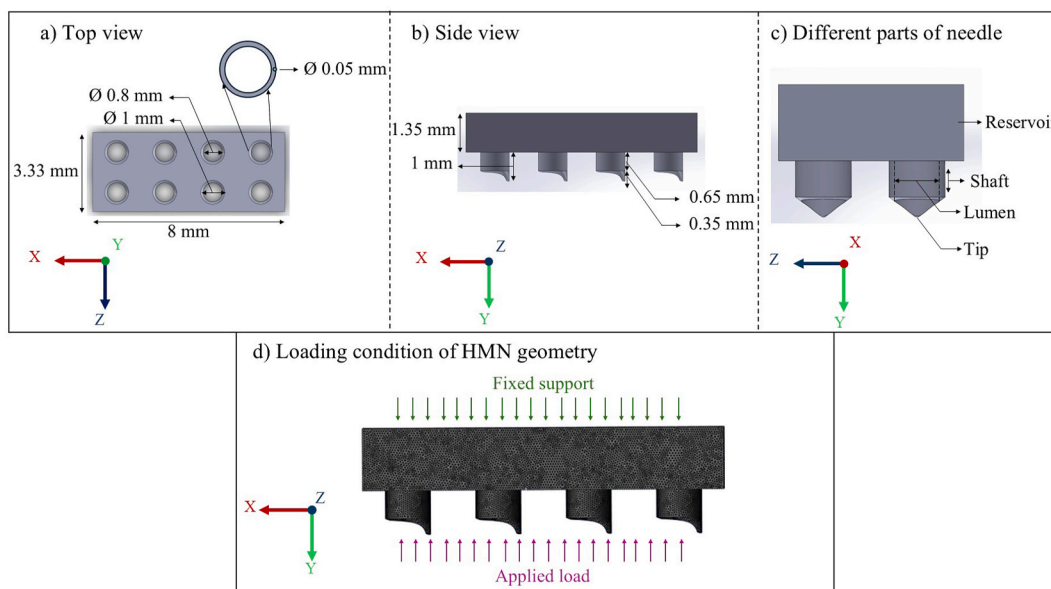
(a) Top view; (b) Side view; (c) Different parts of the needle; (d) Loading condition of HMN geometry.
